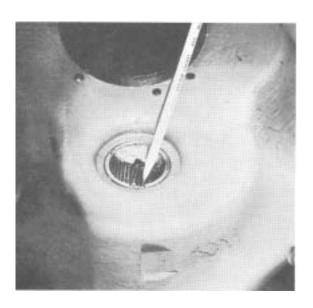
Coat countershaft pilot bearing needles with heavy grease to hold in place until countershaft is installed.
